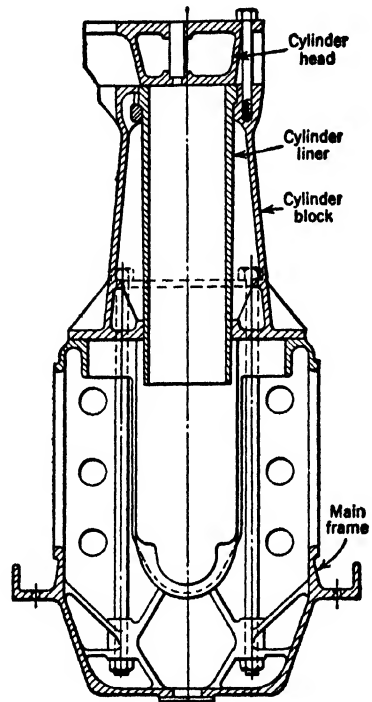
Crankcase and main frame of one-piece box girder type, for multi-cylinder Diesel engine.
